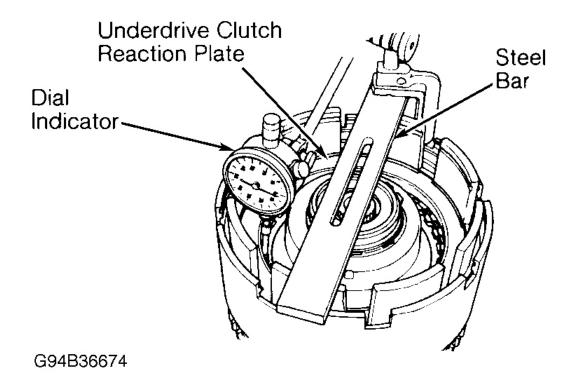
Assembling Dial Indicator Courtesy of CHRYSLER LLC
